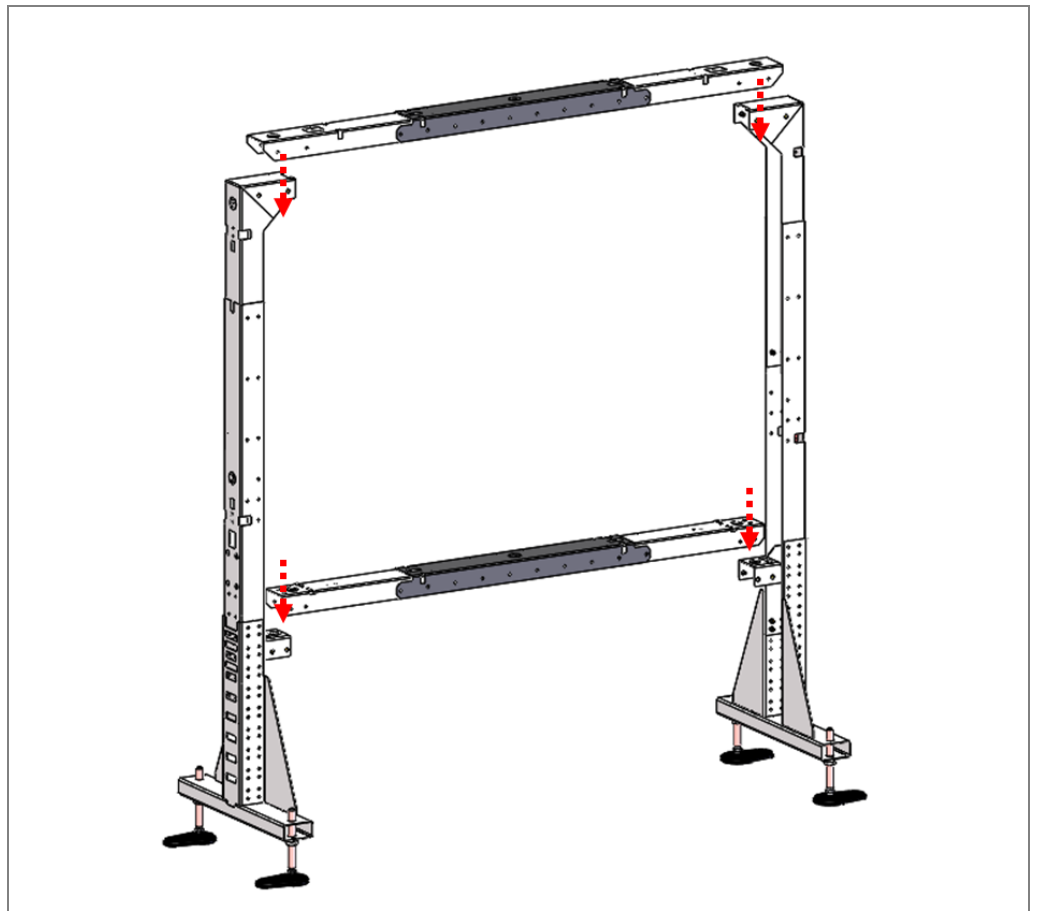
Steel frame: assembling the vertical columns and crossbars
